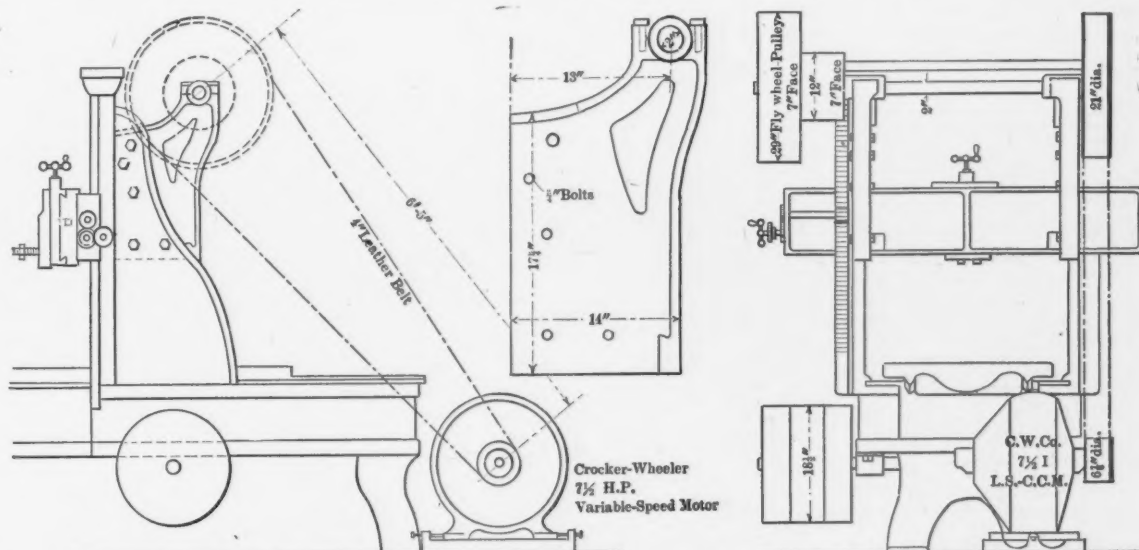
DETAILS OF THE BELTED MOTOR-DRIVE THAT WAS APPLIED TO THE NEW HAVEN PLANER, SHOWING STYLE OF COUNTERSHAFT SUPPORTING BRACKET USED.
